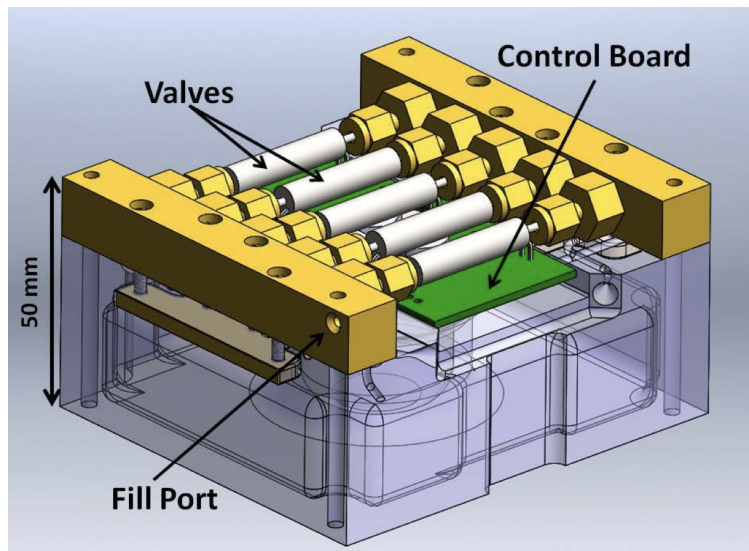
INSPIRE engineering design unit with manifold and valves highlighted [18]
